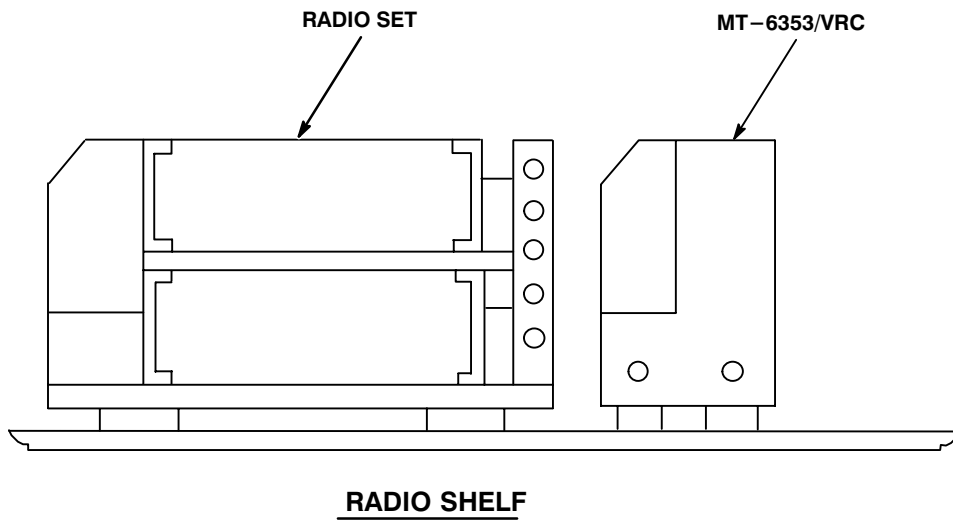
(2). MK and Radio Installation: Radio Equipment Locations
